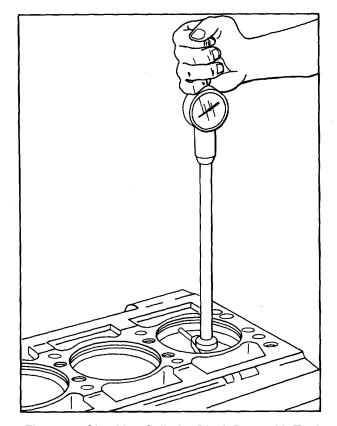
Checking Cylinder Block Bore with Tool J 5347-01
